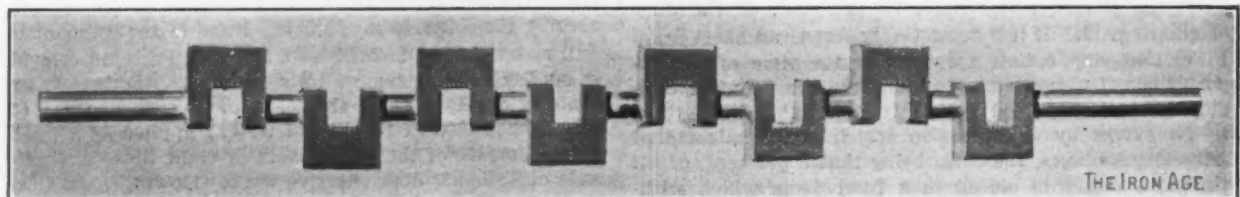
An Eight-Throw Crank Shaft Cut Out by the Machine Shown in Fig. 2.
